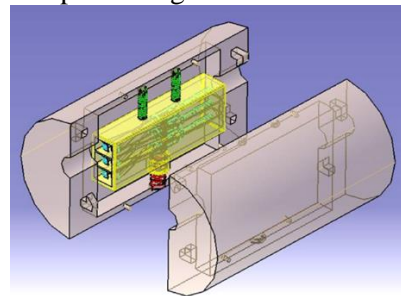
Complete position of the Concept Design 3, with position of clips, cartridge, upper spring and lower spring inside housing
